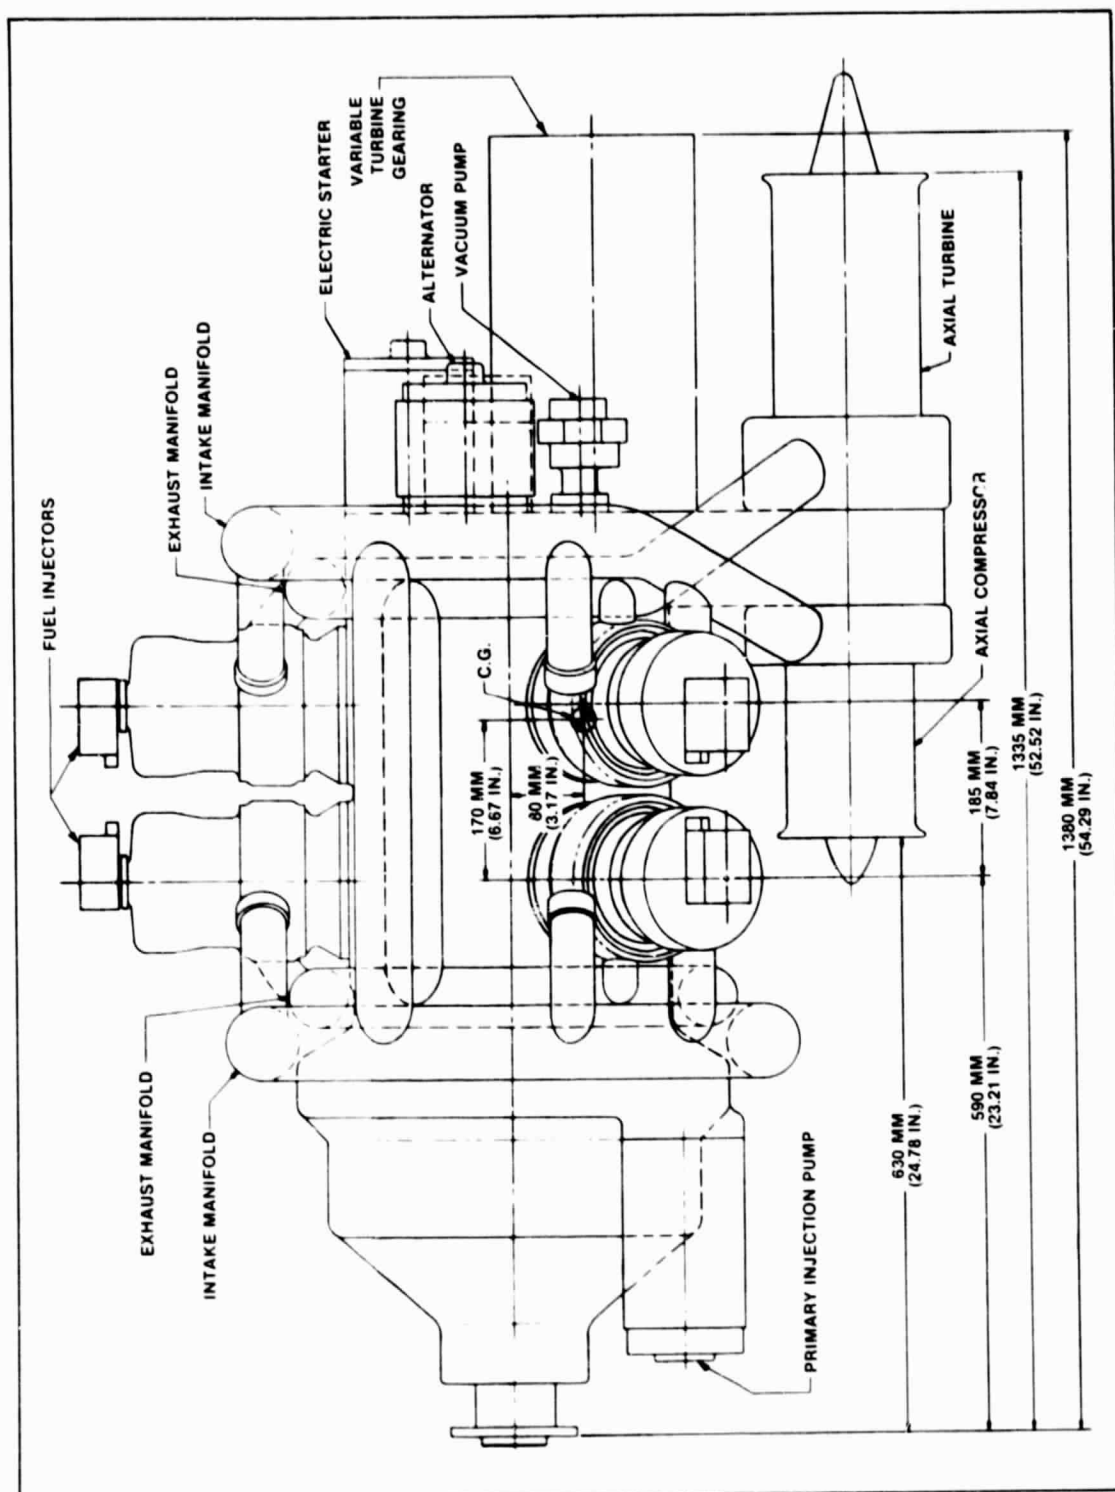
895 kW COMMUTER AIRCRAFT DIESEL - SIDE VIEW
